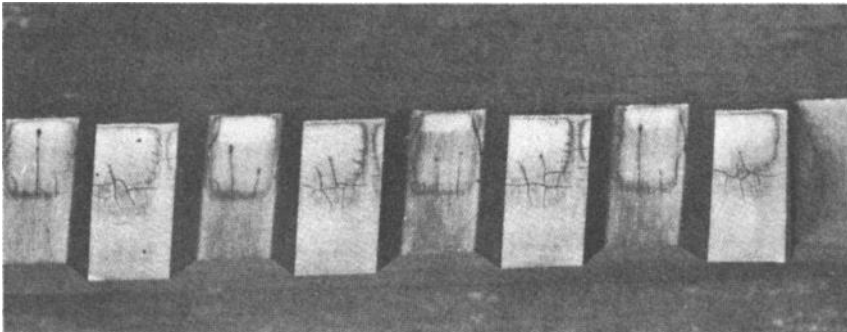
Grinding damage on a T1 steel tap that failed in service
